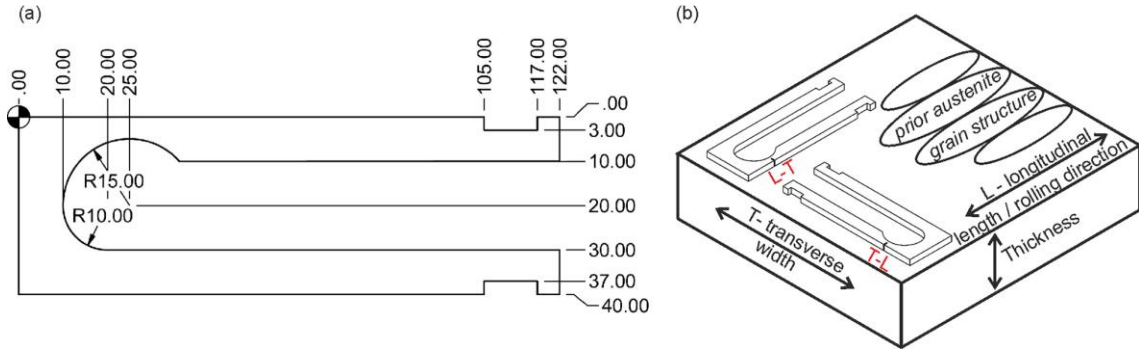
(a) Tuning-fork specimen with dimensions in mm, specimen thickness 5 mm. (b) Specimen and crack plane orientation codes.
